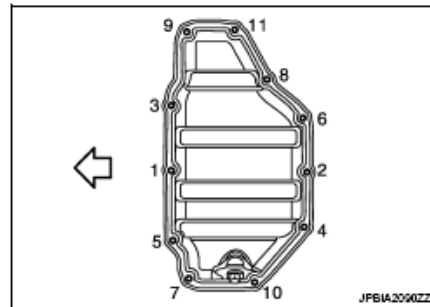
Identifying Oil Pan (Lower) Bolt Tightening Sequence
